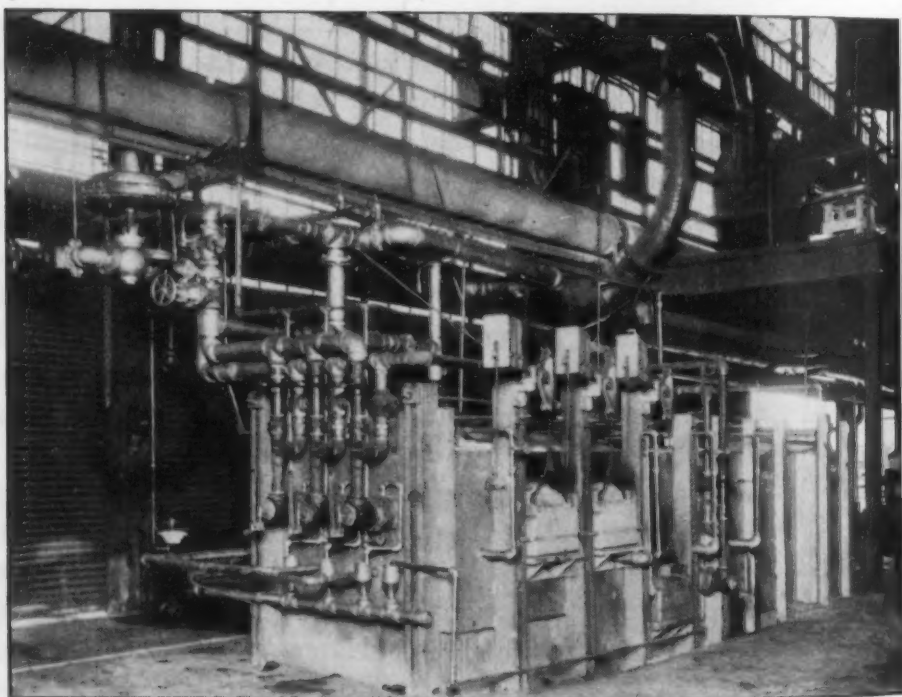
Outlet End of Furnace Shown in Fig. 5.
